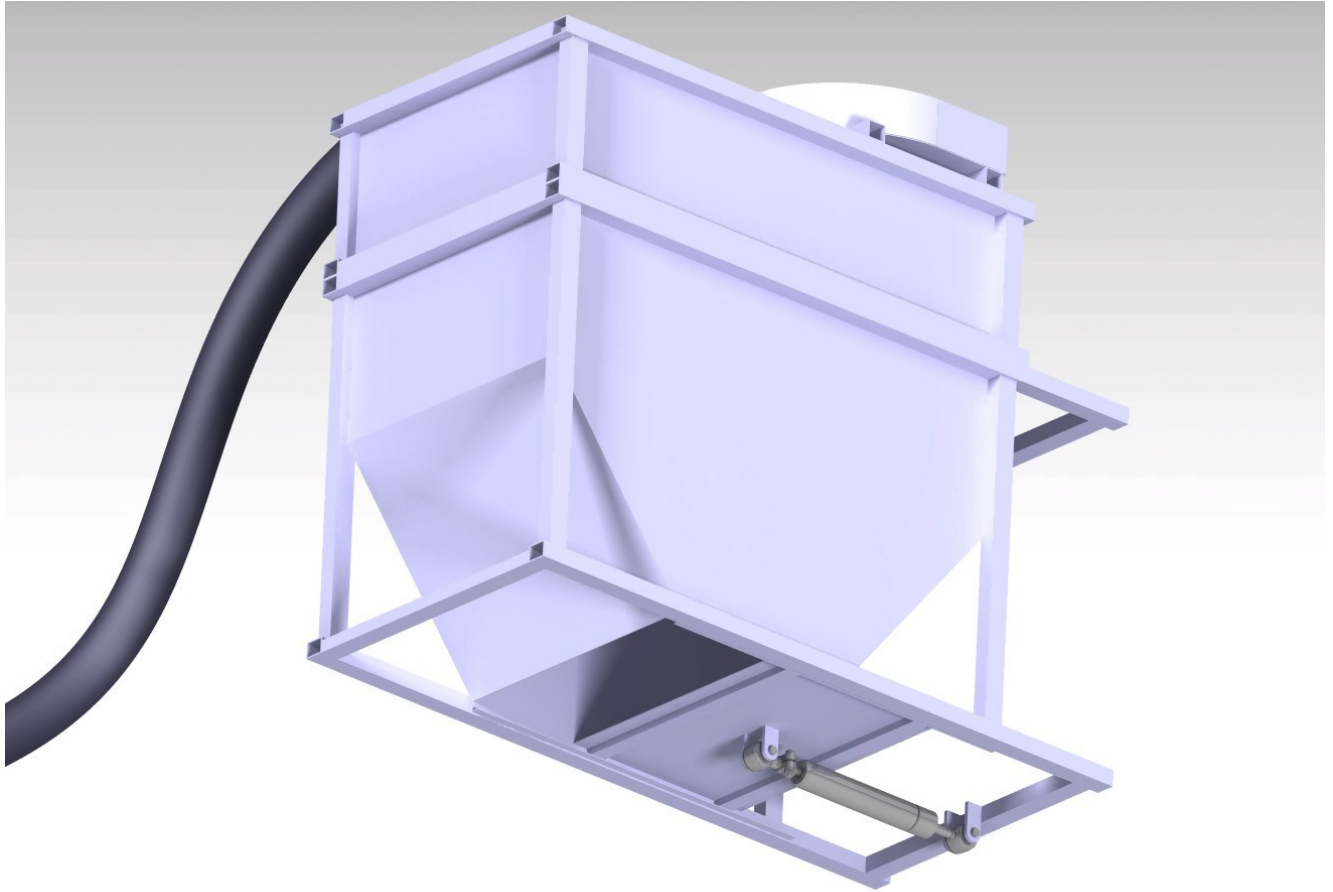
Bottom view of the aspirator device. The floor plane can be moved by the hydraulic cylinder for the unloading process.
